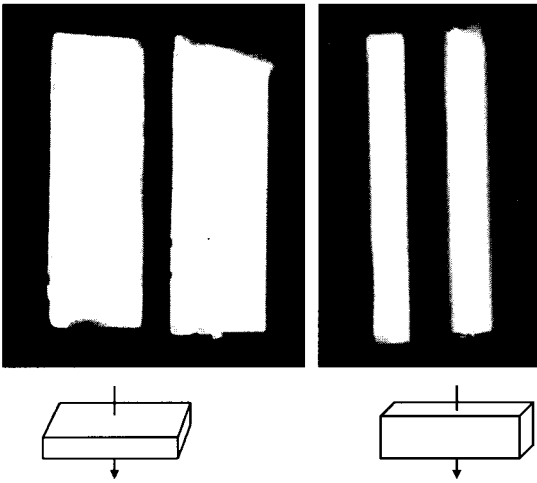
X-ray shows  $\varnothing$  0.0508 mm single platinum wire after pressing.(staining technique)
